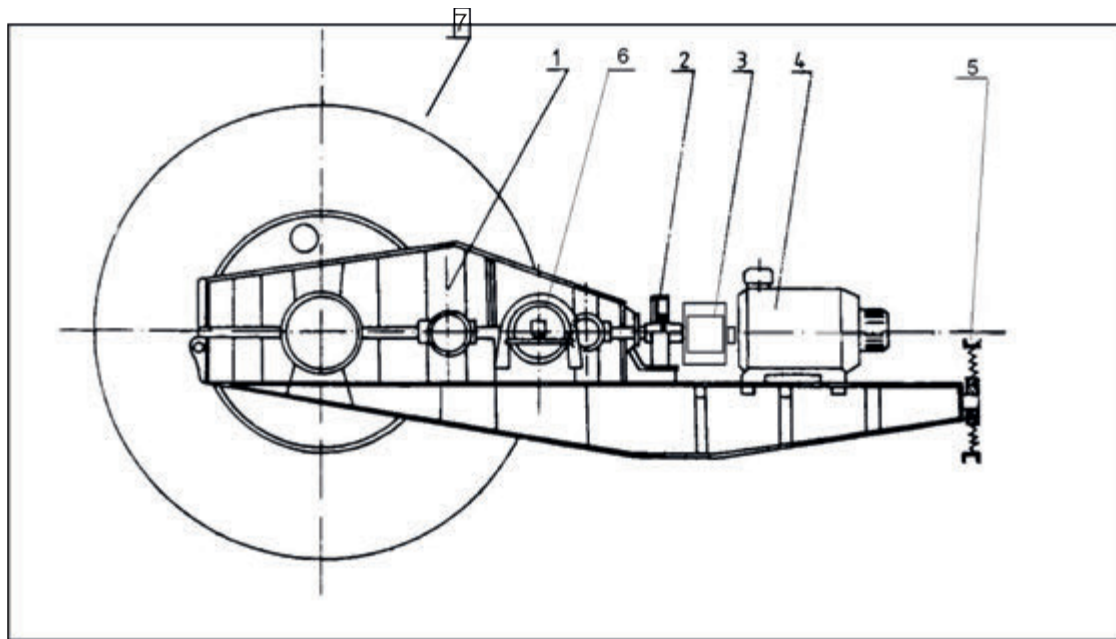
The bucket wheel drive mechanism of BWE prior modernization [4]. 1 - Bevel-cylindrical gear with build-in overload clutch 6, 2 - brake, 3 - flexible clutch between motor and gear, 4 - electric motor, 5 - shock absorber, 7 - bucket wheel
